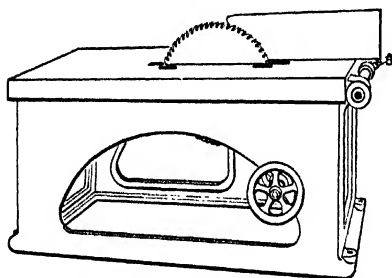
Rising and Falling Spindle Circular Saw-bench, with Hollow Box-pattern Frame
